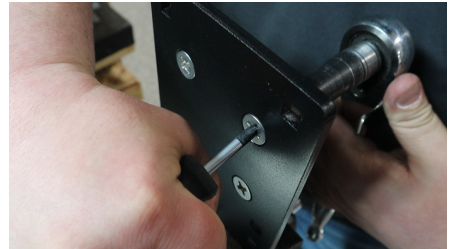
Tighten plated sway ball using a phillips screwdriver & 9/16" wrench.
